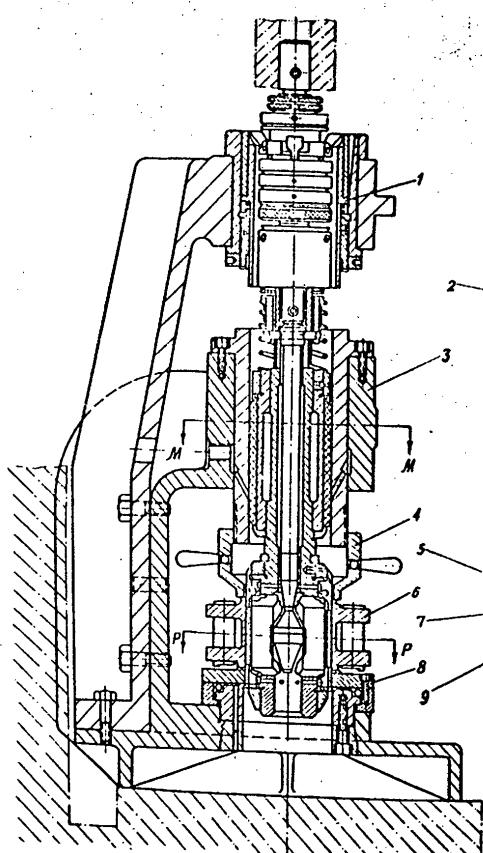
DRIVING PUSHING TOOL, IN MASTERS ROD CHUCKING END WITH THE AID OF FIGURE II-12/146
